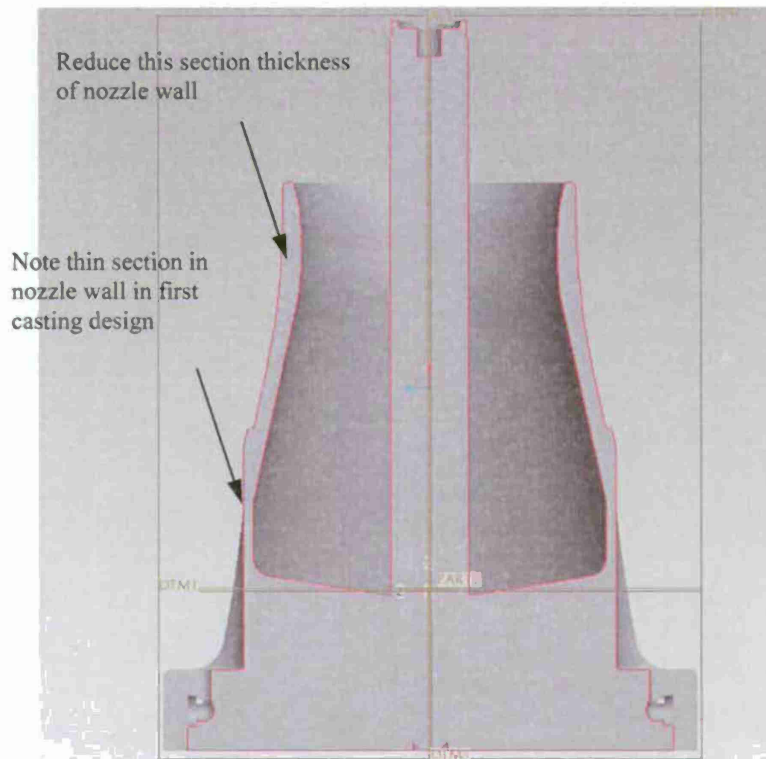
Cross section of first breech nozzle casting design showing wall section to be reduced and the section of nozzle wall that has smallest thickness, indicating the opportunity to reduce the overall wall thickness to this thin section.
